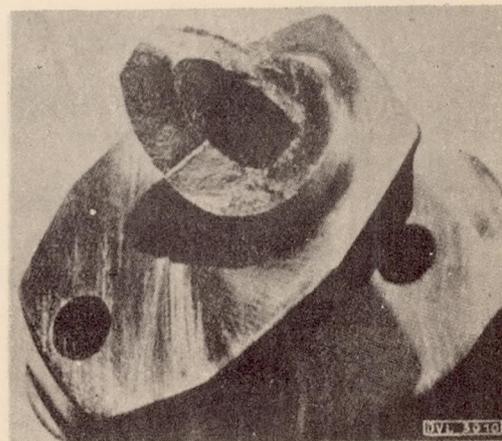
Torsional fatigue of a crankshaft model, beginning at inner edge of oil hole.
